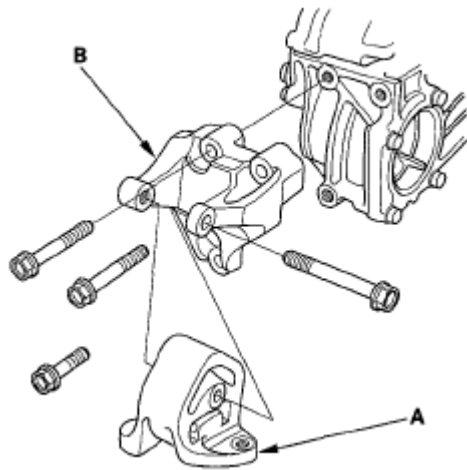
Identifying Rear Transmission Mount And Rear Transmission Mount Bracket (4WD)
